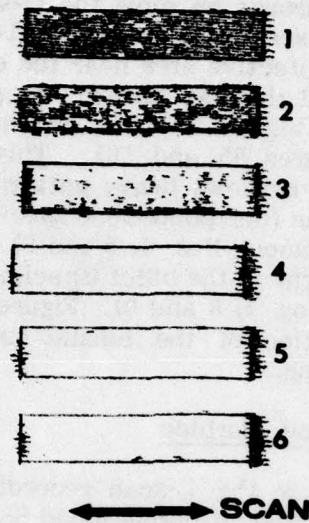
C-scan Recording of 45 MHz, 18° Surface Wave Inspection of Tensile Surfaces of Ceralloy 146 HPSiC Four-Point-Bend Specimens.
